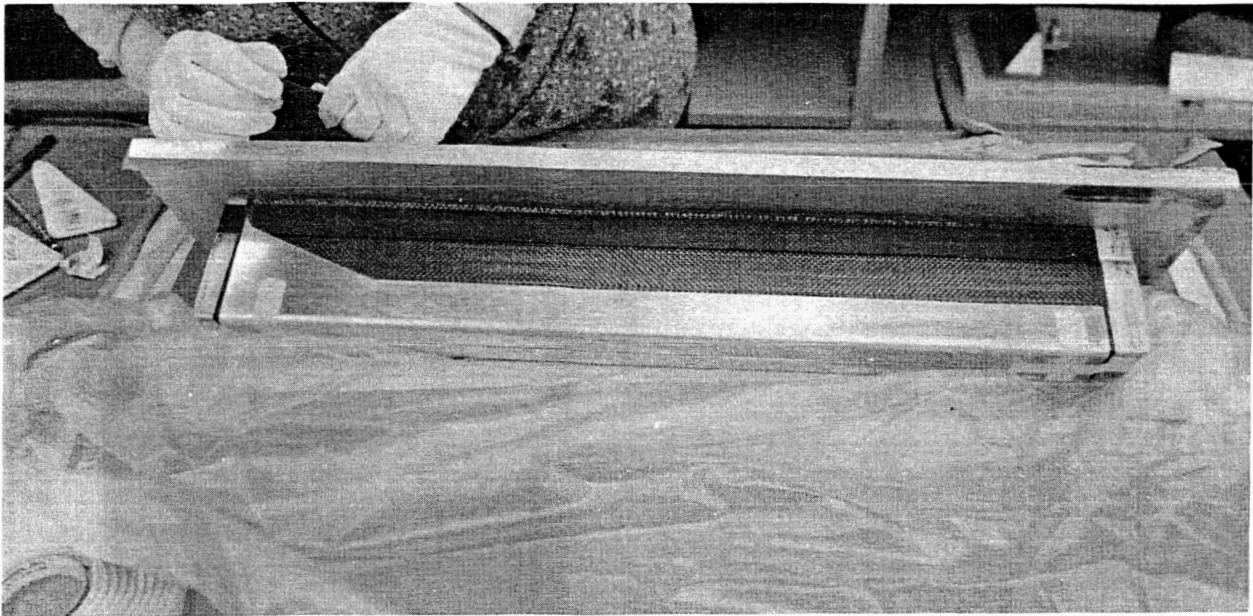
Rear-Spar Test Part Showing Location of Precured Filler
